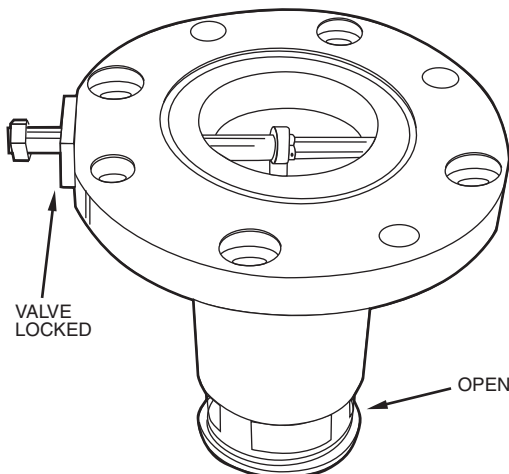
Suction Service Valve Locking Device, Open and Locked (Flooded Cooler Units)
